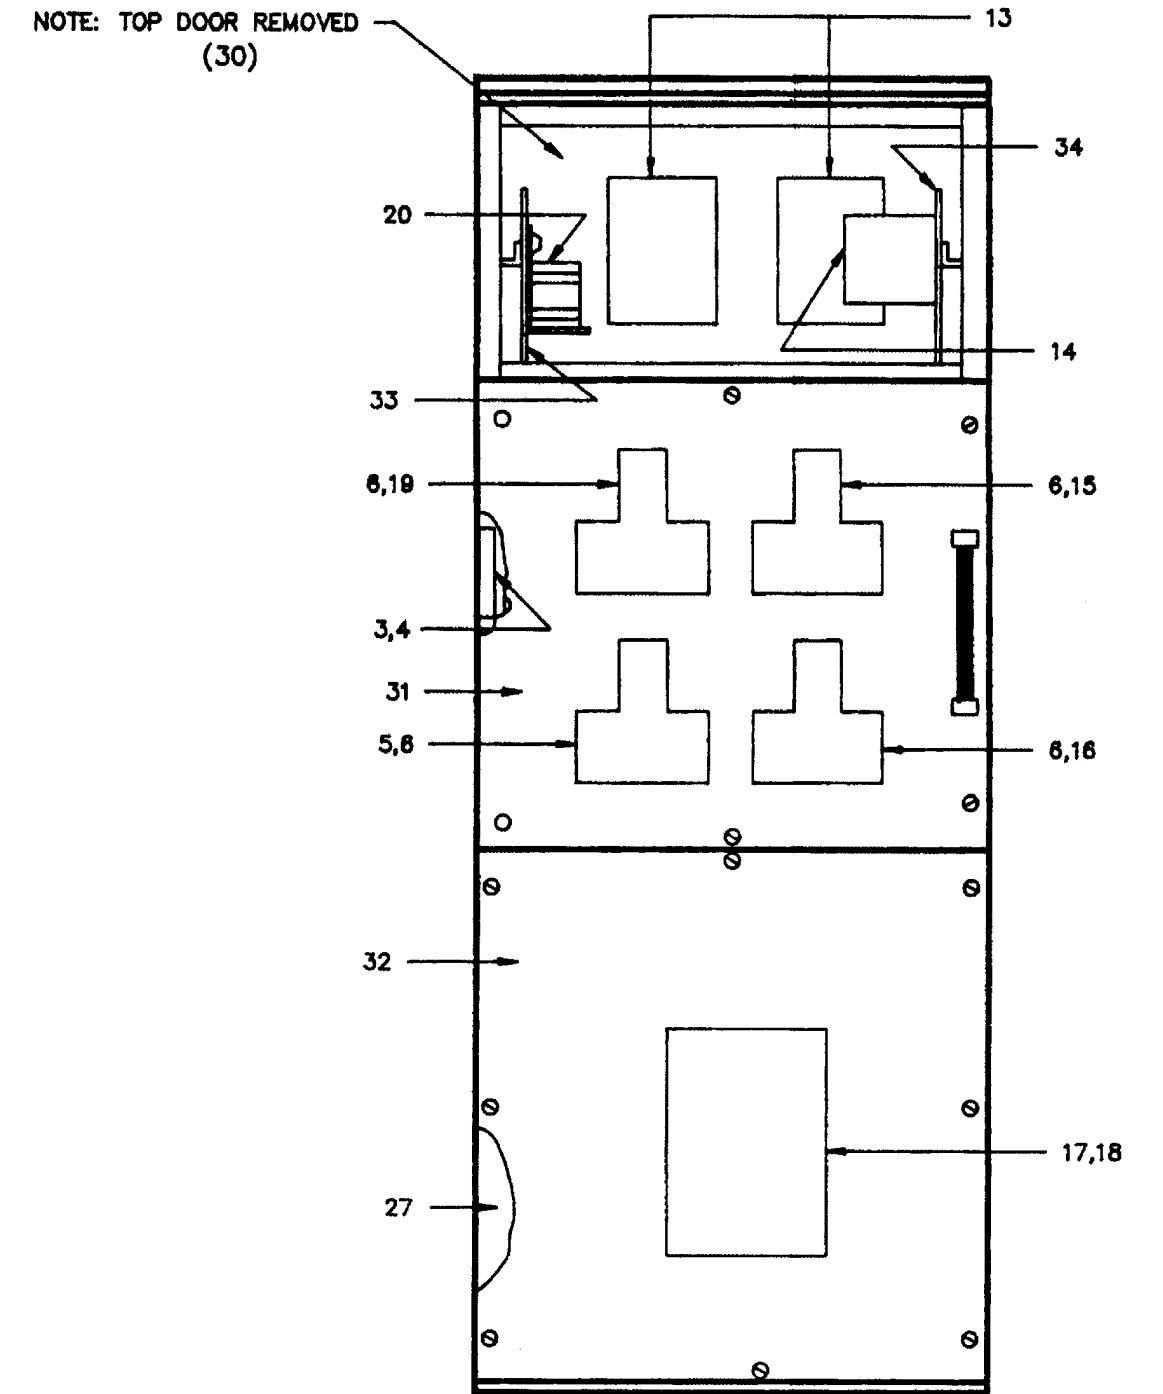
ISC Switchboard Assembly (Sheet 1 of 2)
